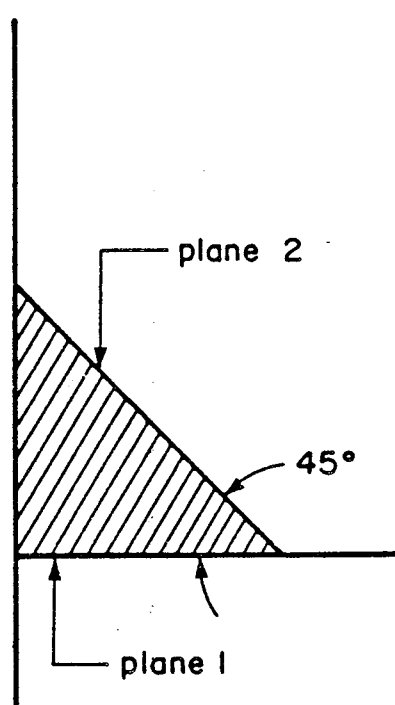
Bent's failure planes for a Non-reinforced Weld
